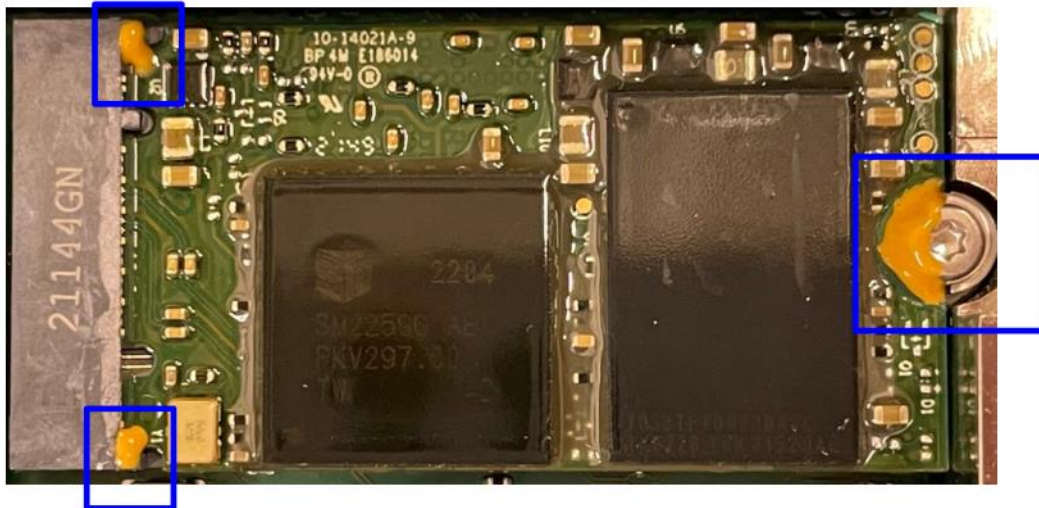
M.2 Module Insertion with threaded rod previously installed.
